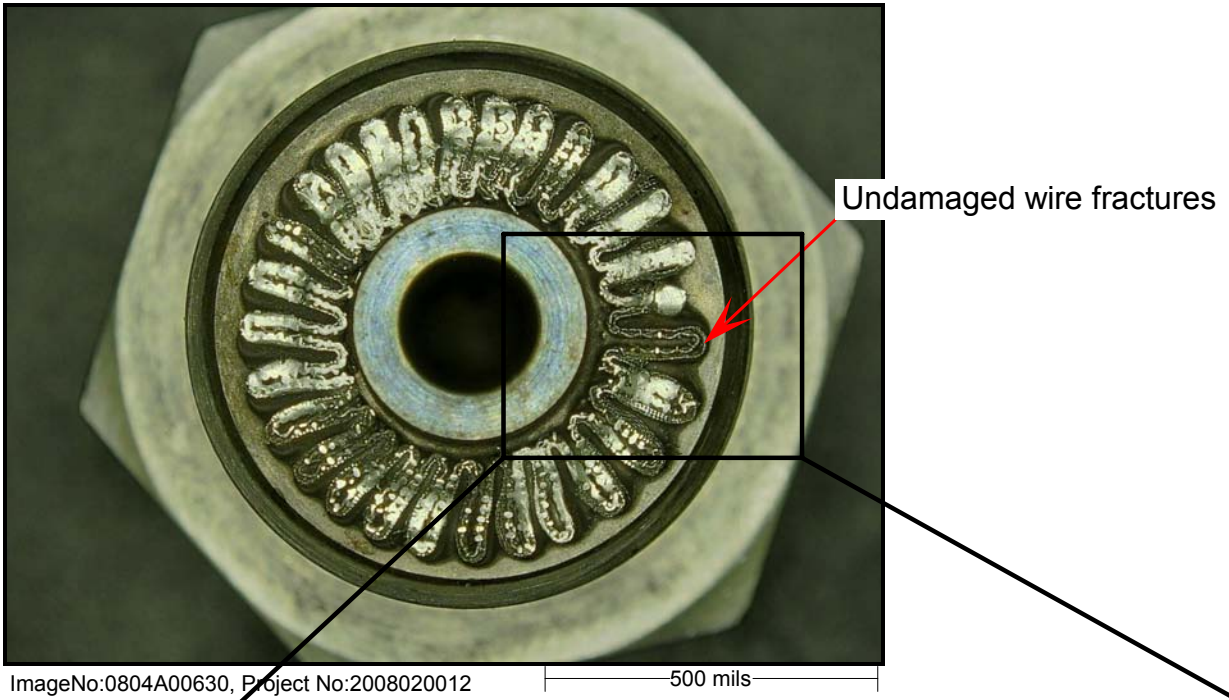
The fitting side separation showing the pleat with undamaged wire fractures.
